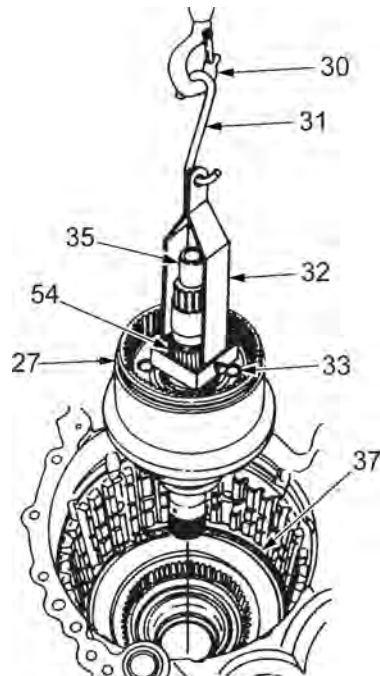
Range Input Shaft and Center Carrier Assembly Installation.
